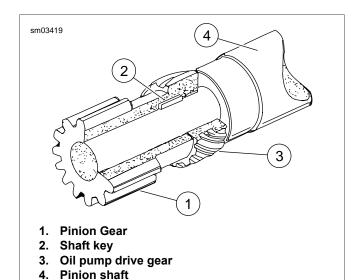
Oil Pump Drive Gear and Pinion Gear Installed on Pinion Shaft
